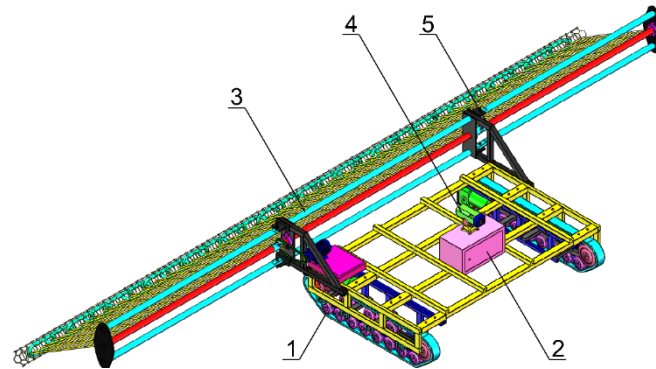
Structure schematic diagram of garlic film breaker. 1 = Crawler chassis, 2 = Control box, 3 = Foldable film-broken device, 4 = Camera, 5 = Supporting frame.
